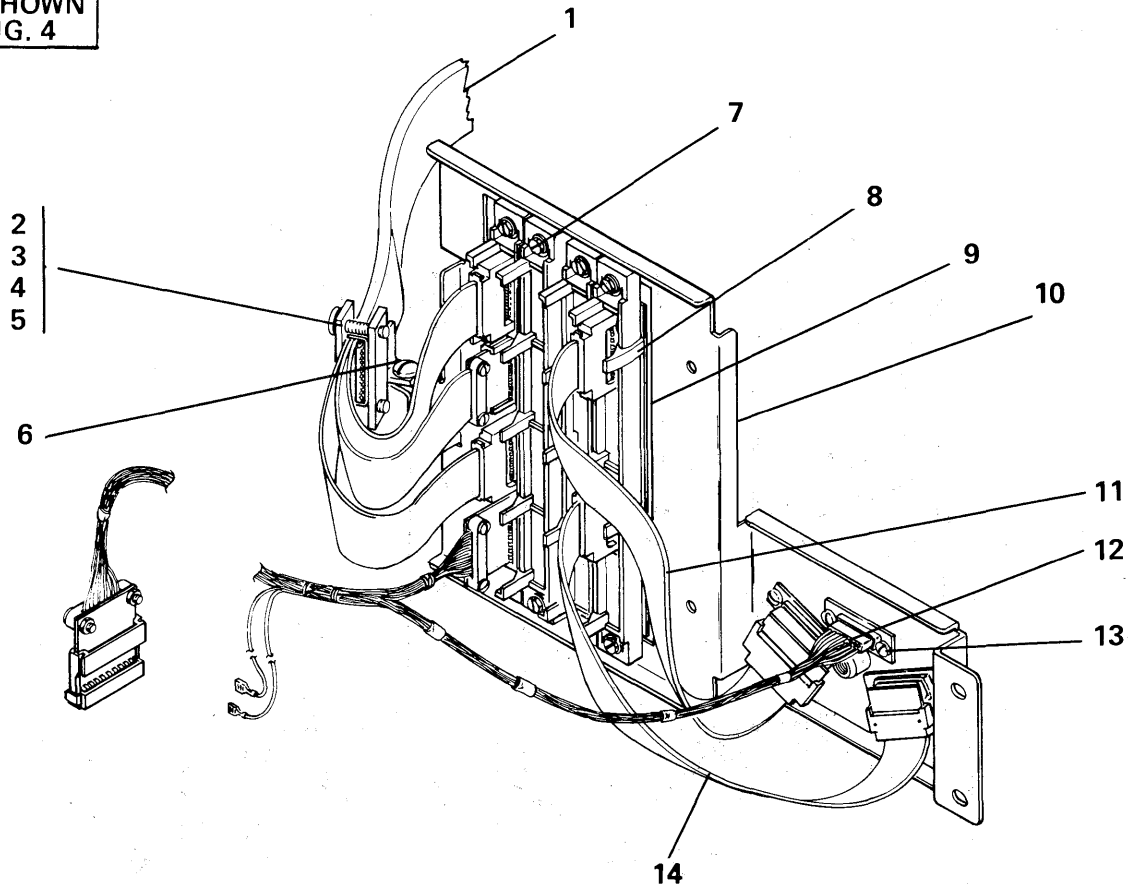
CIRCUIT BOARD ASSEMBLY. SEE LIST 10.
